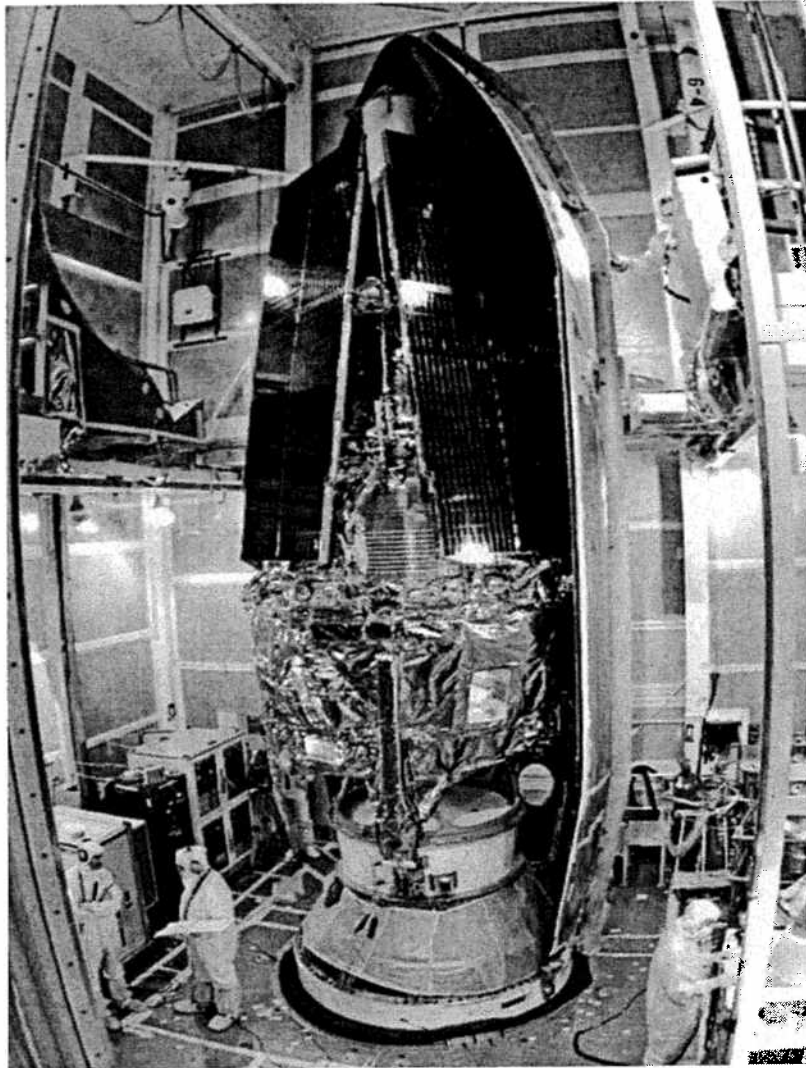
Dewar final assembly is completed and ready for acceptance testing
